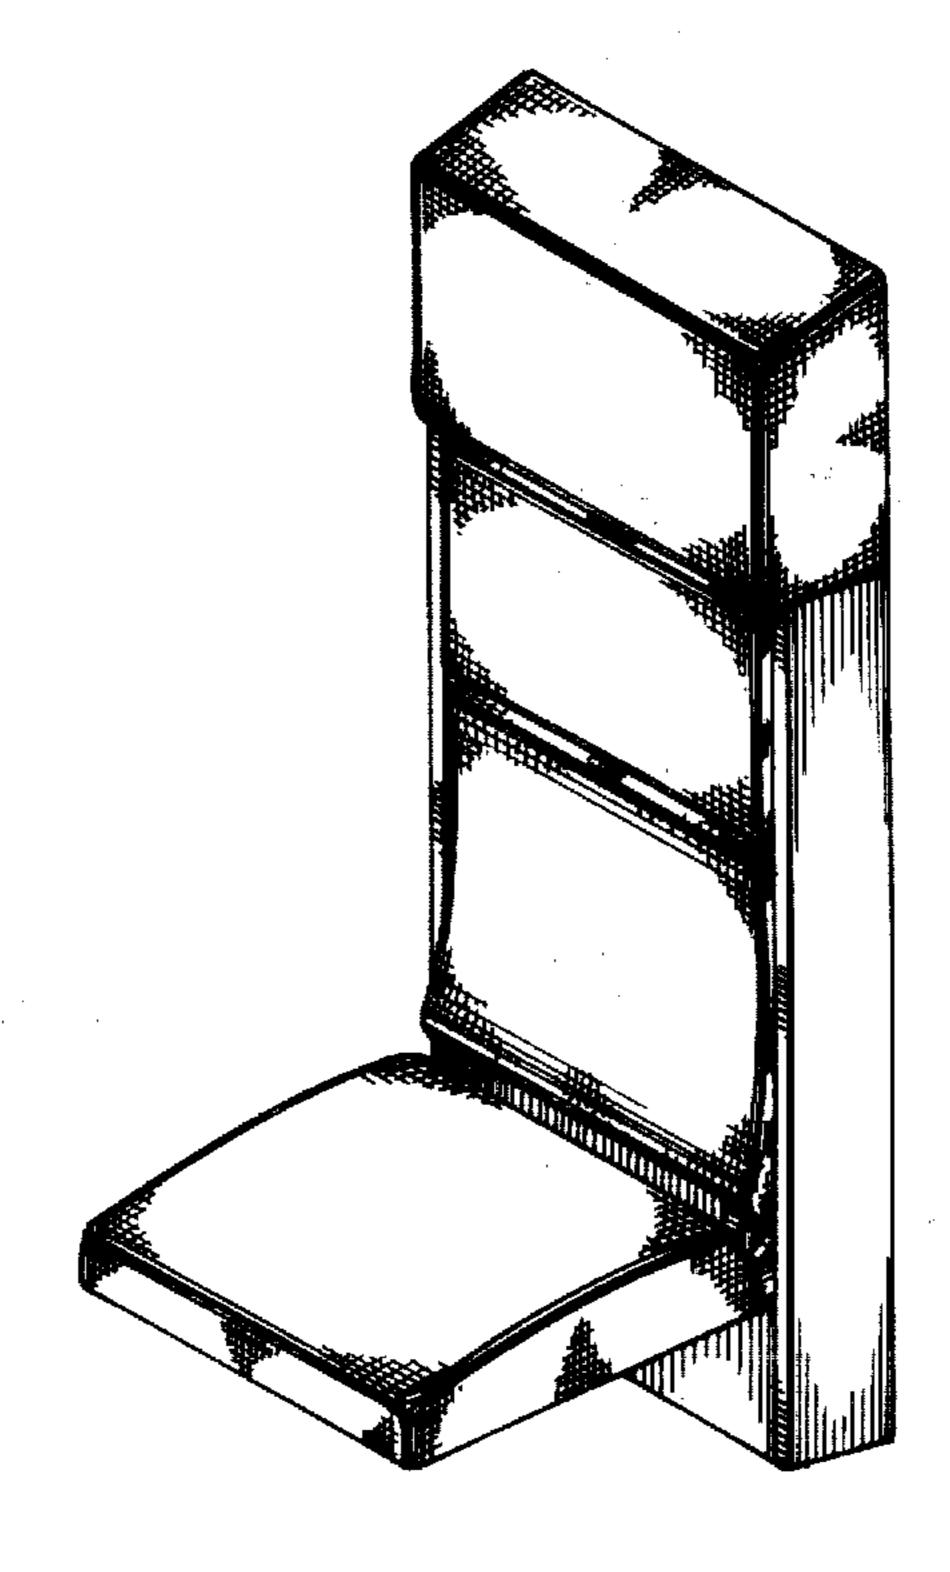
is a bottom view of the seat as shown in FIG. 1; FIG. 6 is a front isometric view of the folding wall-mounted seat or the like shown in an open position;
